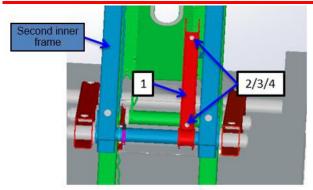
Installation of second layer pipeline 1. Wiring plate assembly b) Smooth the PCU harness and route
